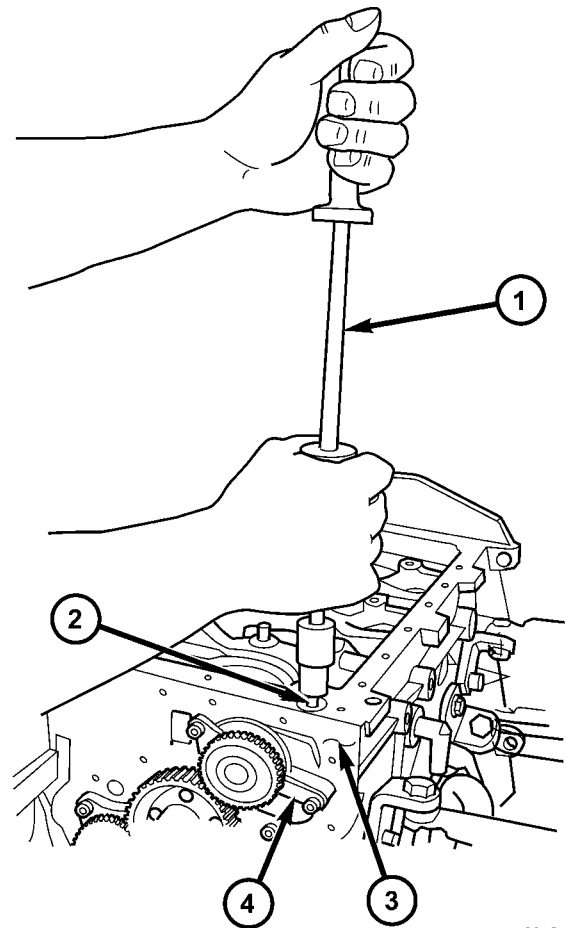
OIL PRESSURE RELIEF VALVE REMOVAL
